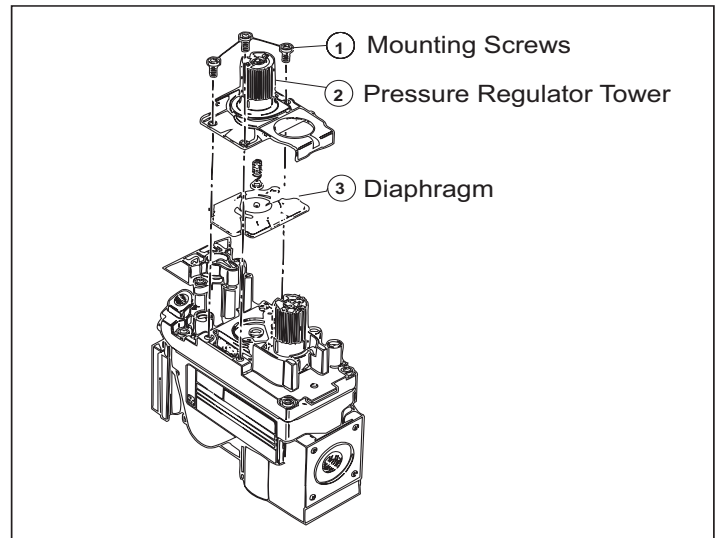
Turn control knob to the OFF position, ensure that gas supply to the valve has been turned off. Using a Torx TH20, or slotted screwdriver, remove the three pressure regulator mounting screws (1), pressure regulator tower (2), and diaphragm (3).
